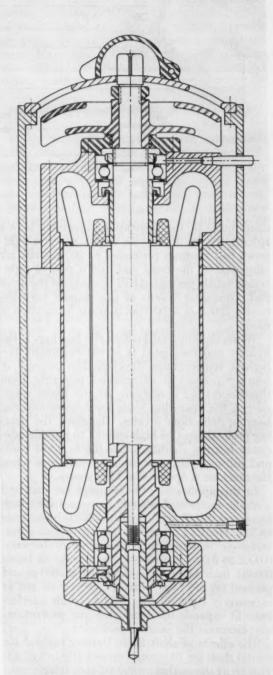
At the work-end, the spindle of this high-speed router is mounted in specially matched angular-contact ball bearings designed to provide zero preload. A floating spring-loaded bearing is employed to support the upper end of this precision spindle.
